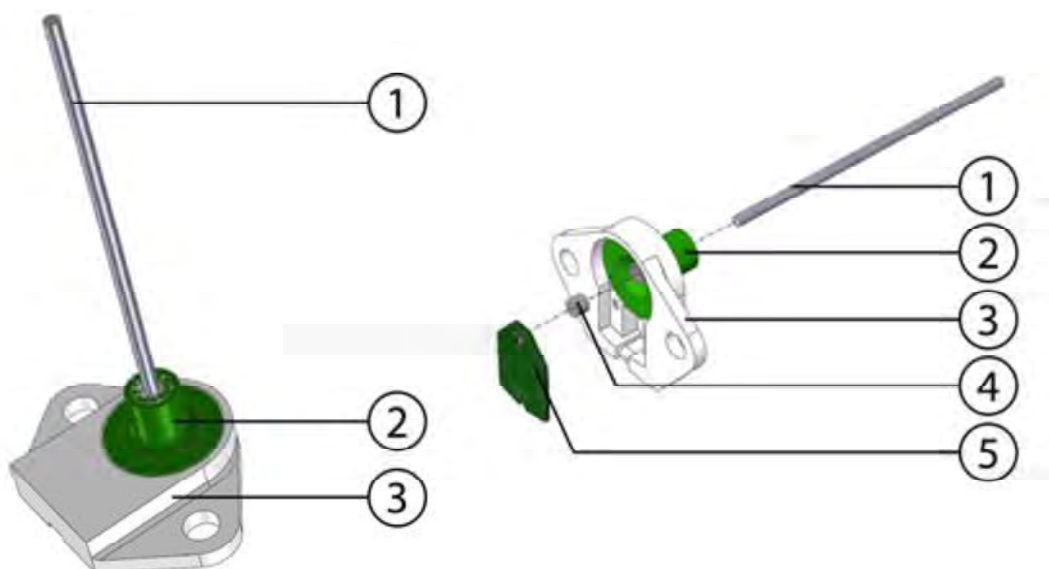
Whisker unit physical design. 1: mast (nylon), 2: compliant joint (silicone rubber), 3: housing (photopolymer), 4: neodymium magnet, 5: PCB holding the sensor chip.
